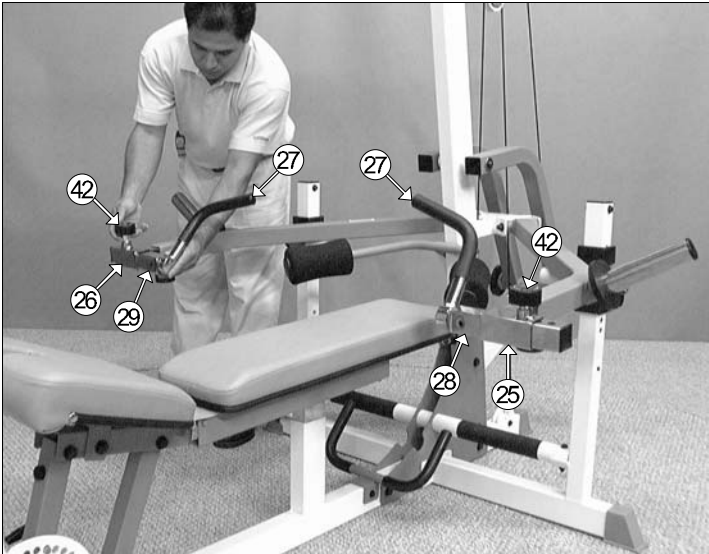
Insert the left and right Handle Housing Tubes (#28, #29) into the receptacles of the left and right Extension Arm Tubes (#25, #26). Be sure to disengage the Turn/Pull Pin w/Knob (#42) as you insert the Handle Housing Tubes (#28, #29) into the receptacles of the left and right Extension Arm Tubes (#25, #26).
